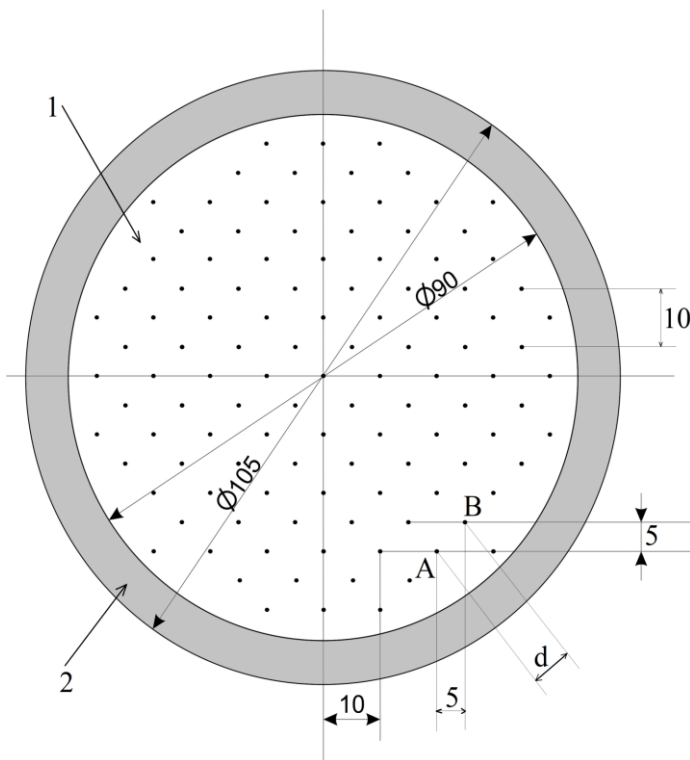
Plate with holes: $n = 113$; $\varnothing 0,05$ mm
